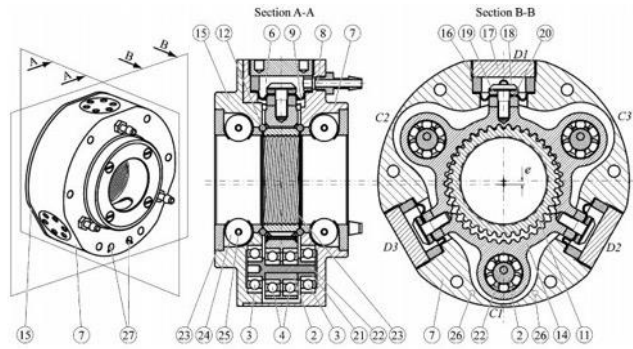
Isometric view and two cross sections of the pneumatic stepper motor. In section B-B we see the three chamber ports, the off-centred gearhead and the motor-shaft. This figure should only support the description in this thesis. Therefore, the numbers in the figure can be ignored.
